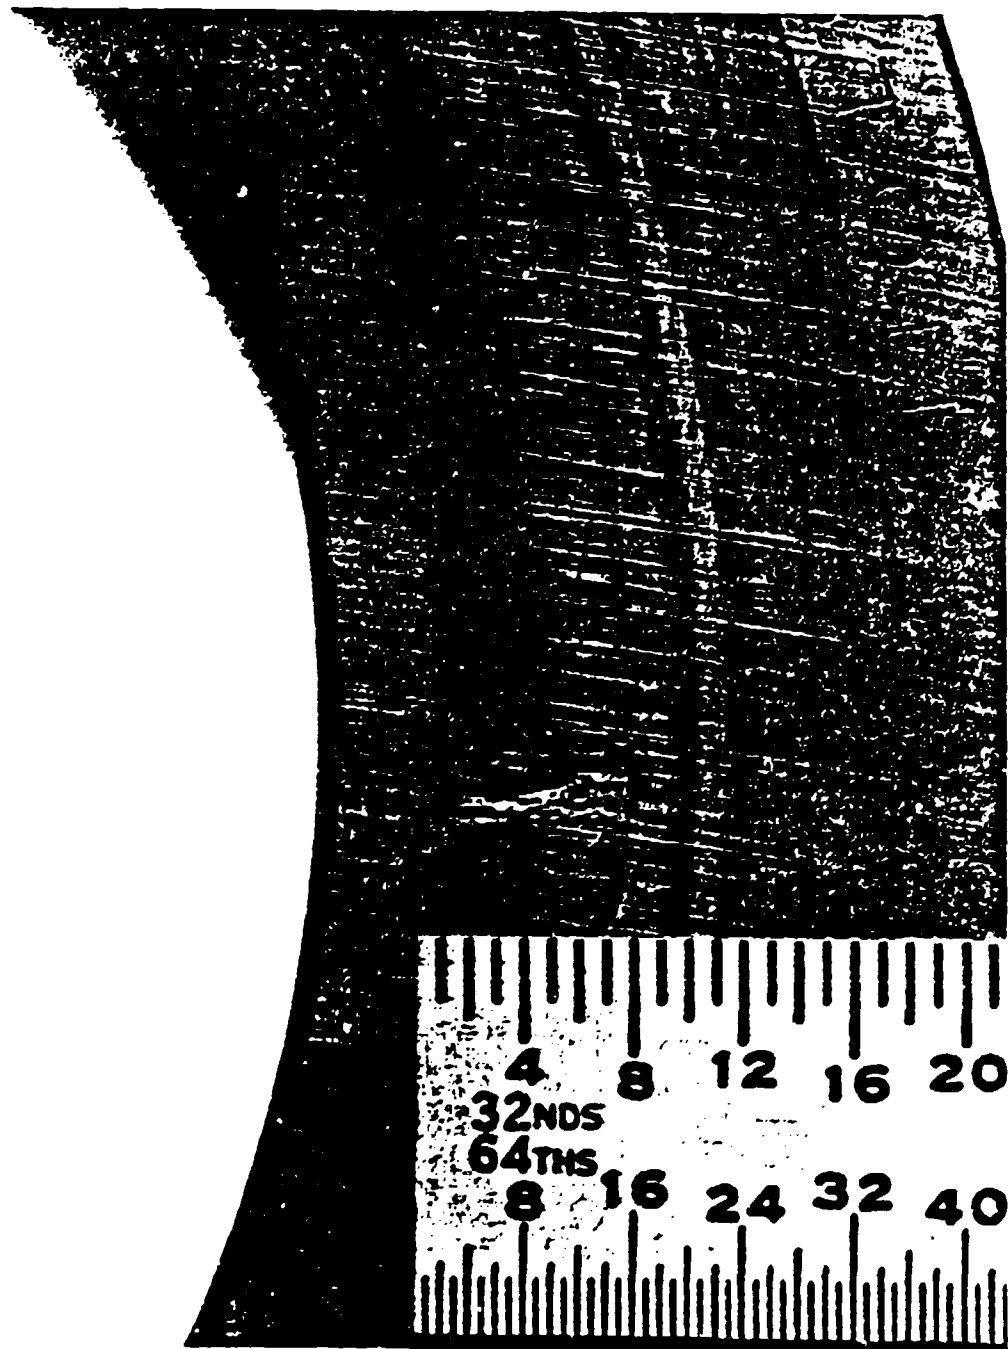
MAGNIFIED VIEW OF SPALLING FOUND ON CAM TO BEARING WEAR PLATE
